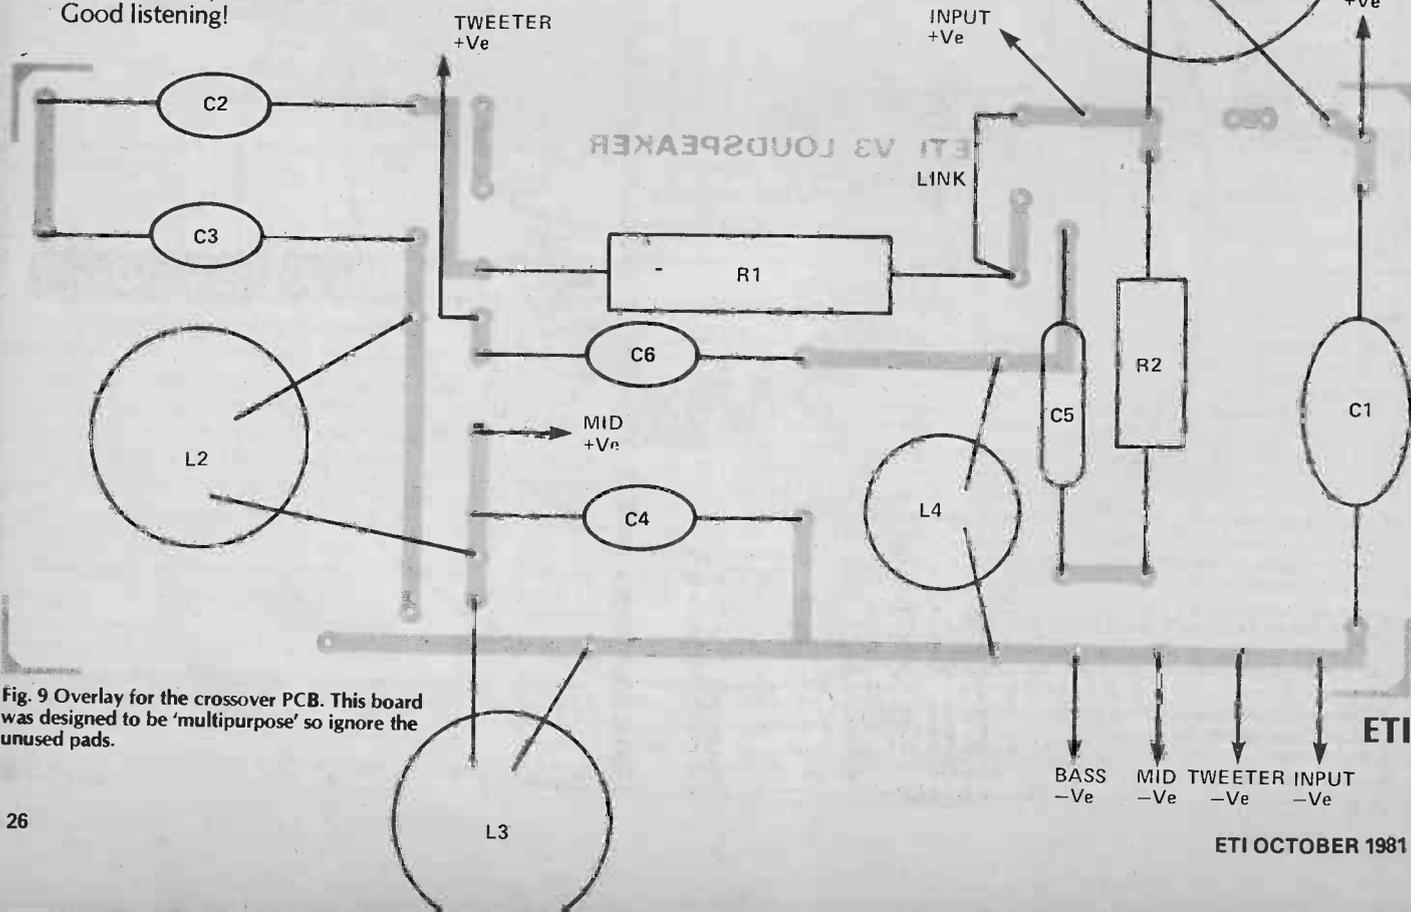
Overlay for the crossover PCB. This board was designed to be 'multipurpose' so ignore the unused pads.
